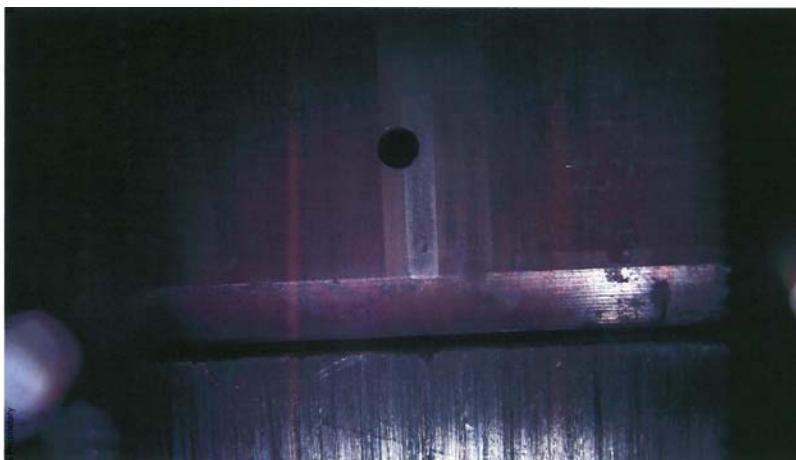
Bearing Pad Wear – Endurance Test 1, Bundle Position 13
